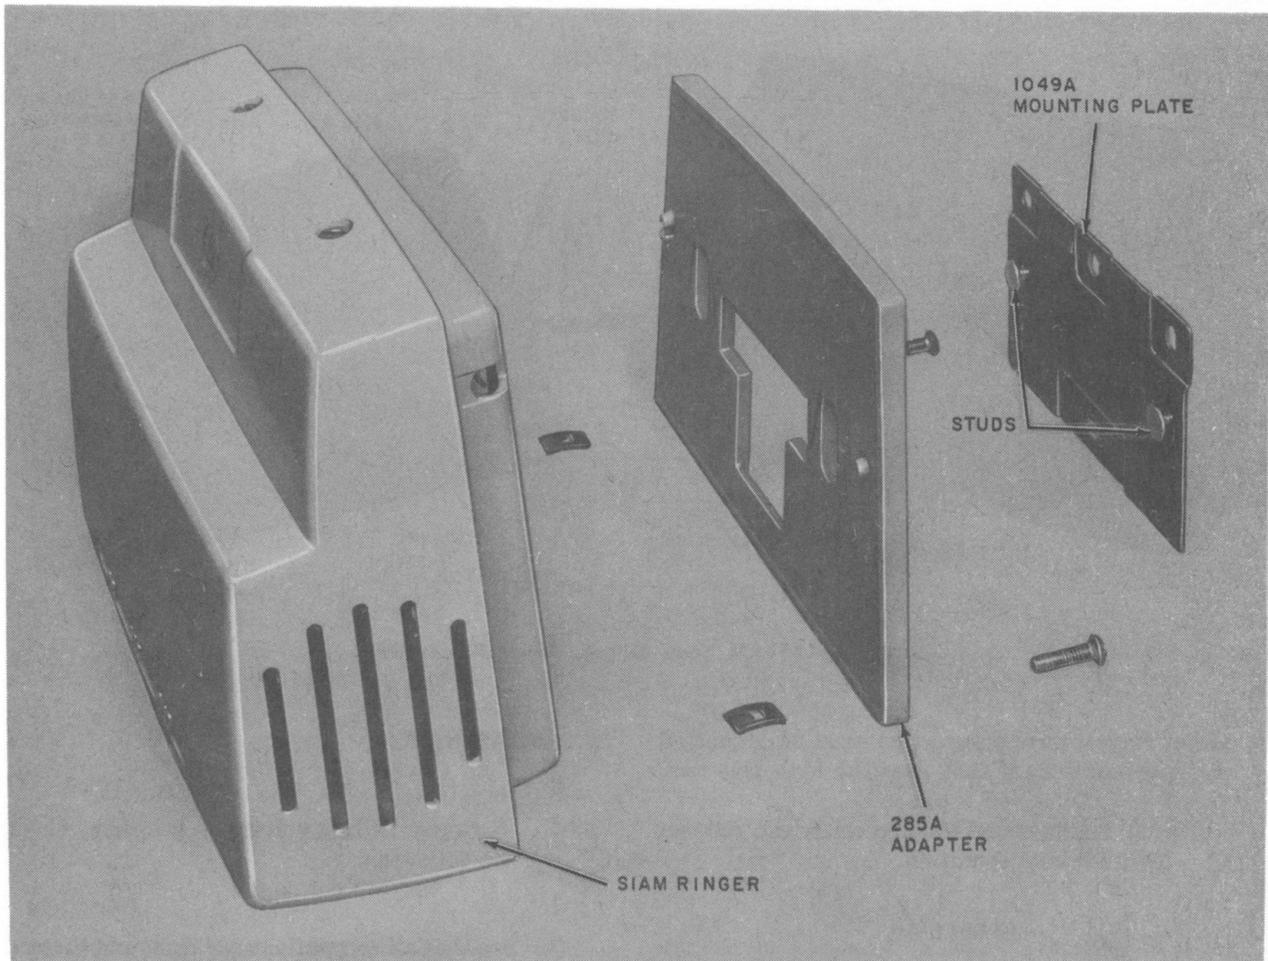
S1AM Tone Ringer With Adapter and Mounting Plate
